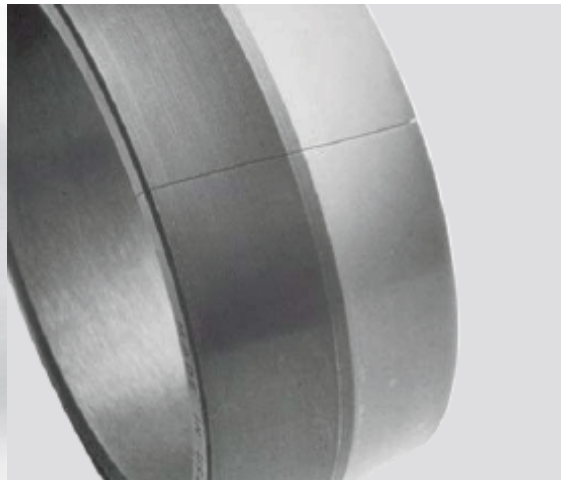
Fractured inner ring of a spherical roller bearing with a tapered bore resulting from excessive drive-up
